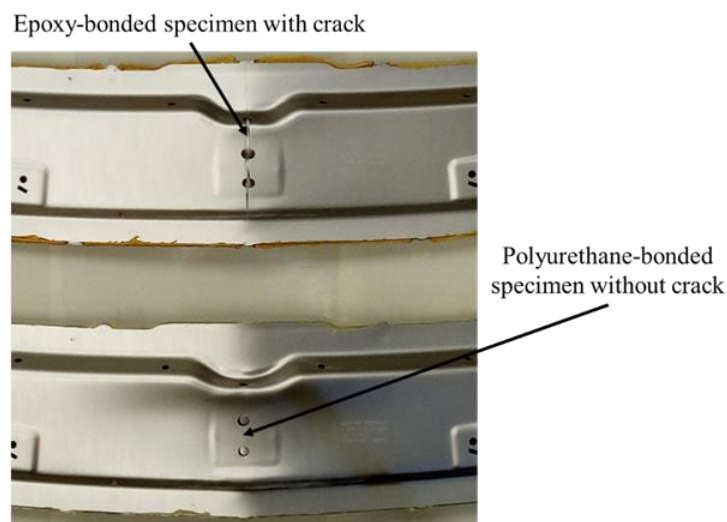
Front header specimens tested under impact condition, showing that aluminium fracture does not occur when polyurethane is used.
